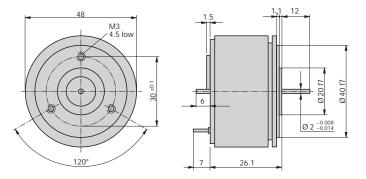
KINAX 2W2 with special drive shaft at front and at rear. At front: Ø 2 mm, length 12 mm. At rear: Ø 2 mm, length 6 mm.
